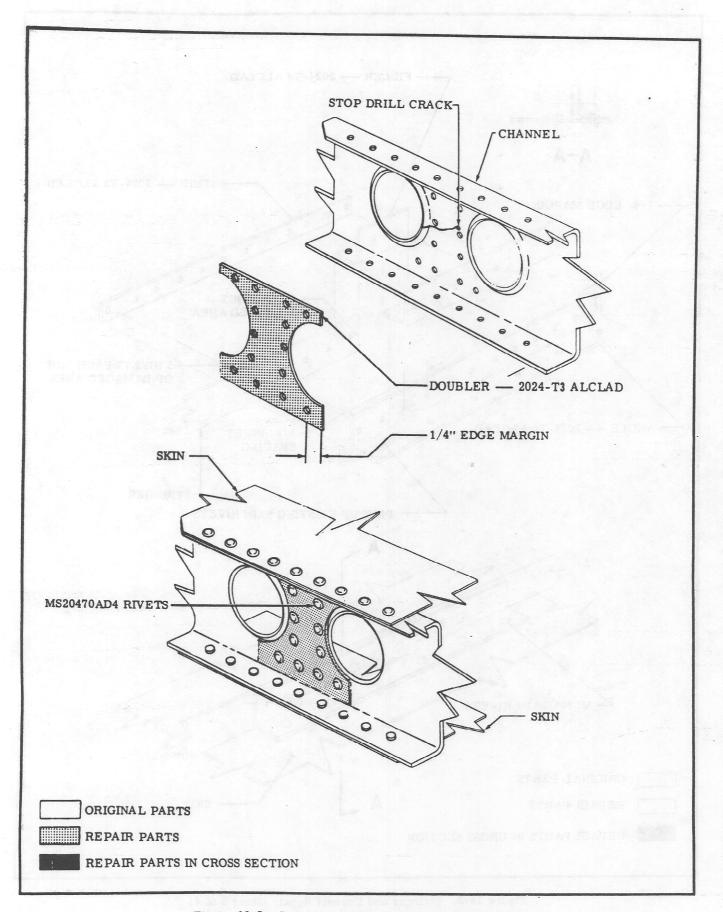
Stringer and Channel Repair (Sheet 3 of 4)
